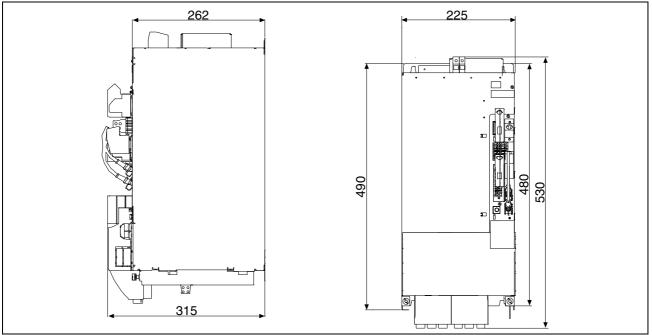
Dimensional drawing HCS03.1E-W0070
